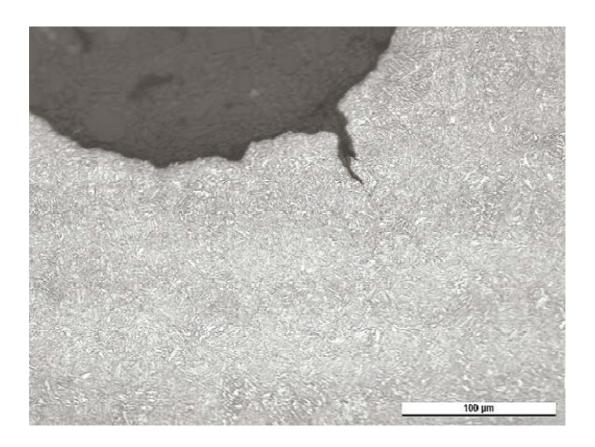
Metallographic section of crack in neighbour thread to last engaged thread.
